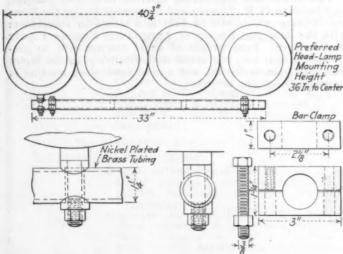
Head-Lamp Bar and Mounting Used in Headlighting Investigation
